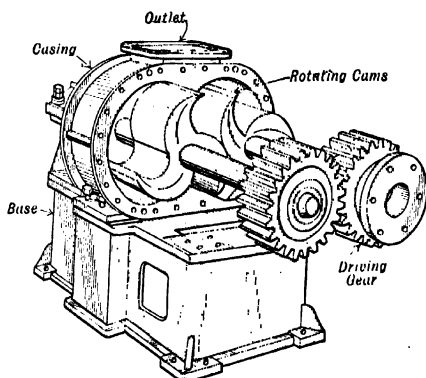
View of Goulds Rotary Pump, Front Cover removed.
